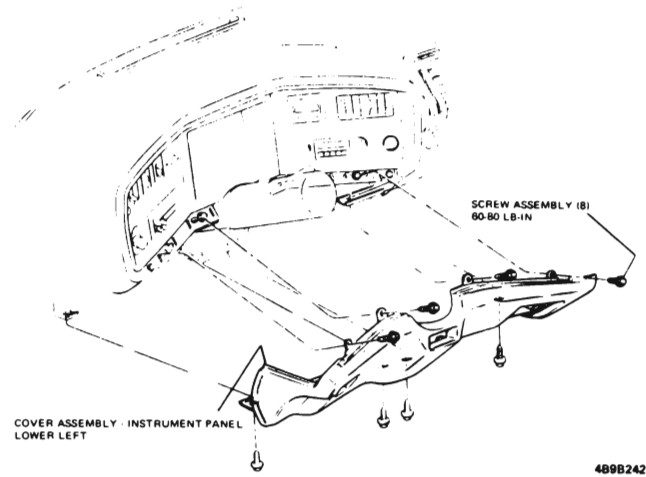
B-156 Instrument Panel Lower Cover Trim Plates - B-C-E Series
